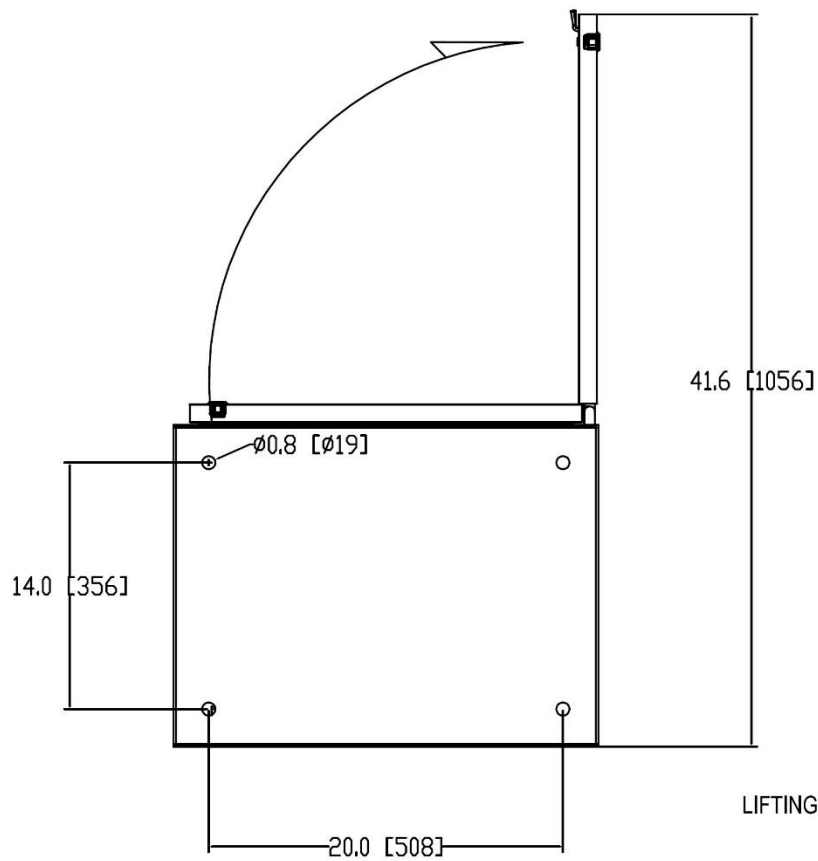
Bottom Dimensions, no Customer I/O Panel (Enclosed)
